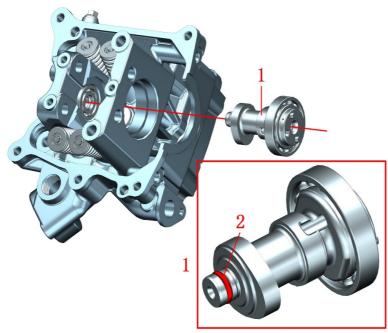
CYLINDER HEAD		Cylinder head cover assembly-3	CHK	(2)
